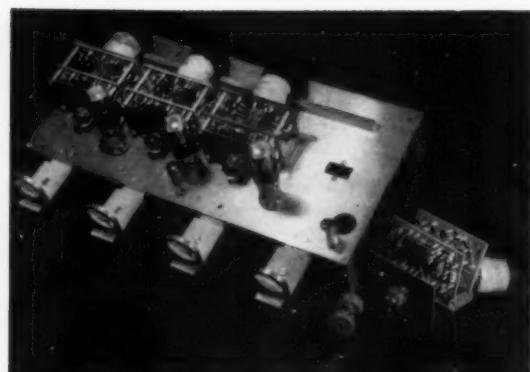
Chassis assembly and a partially exploded view of a plug-in decade, showing its construction.
